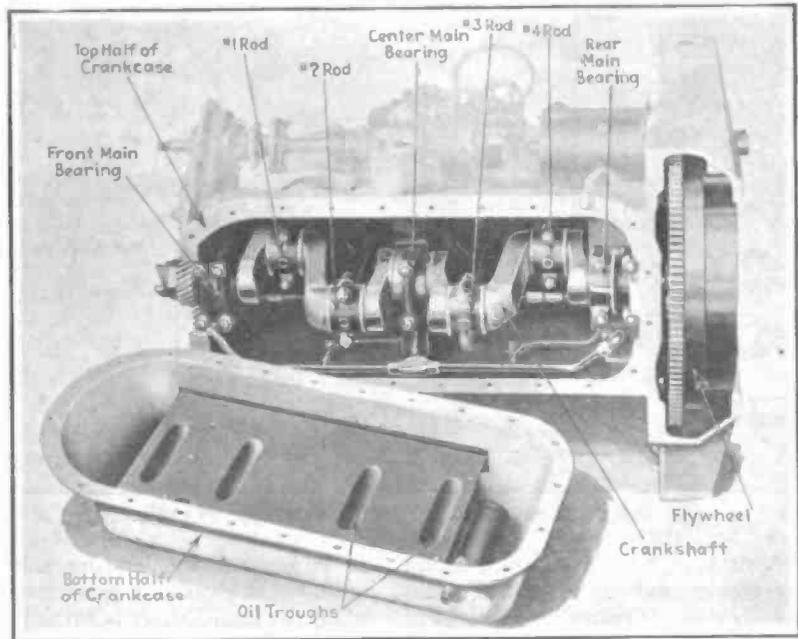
Bottom half removed from four-cylinder automobile engine to expose connecting rods
